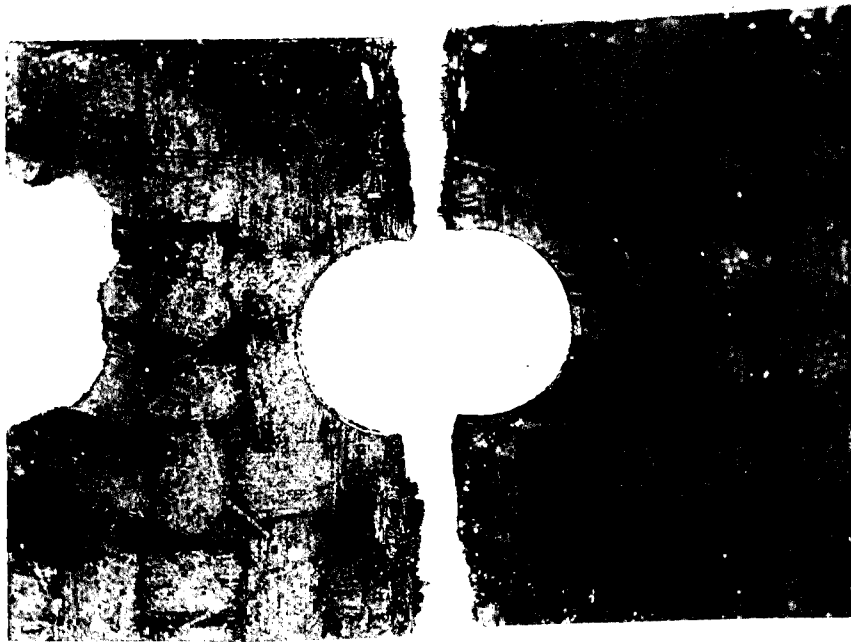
110 MPa Notched Fracture Surface, 8X Mag.
